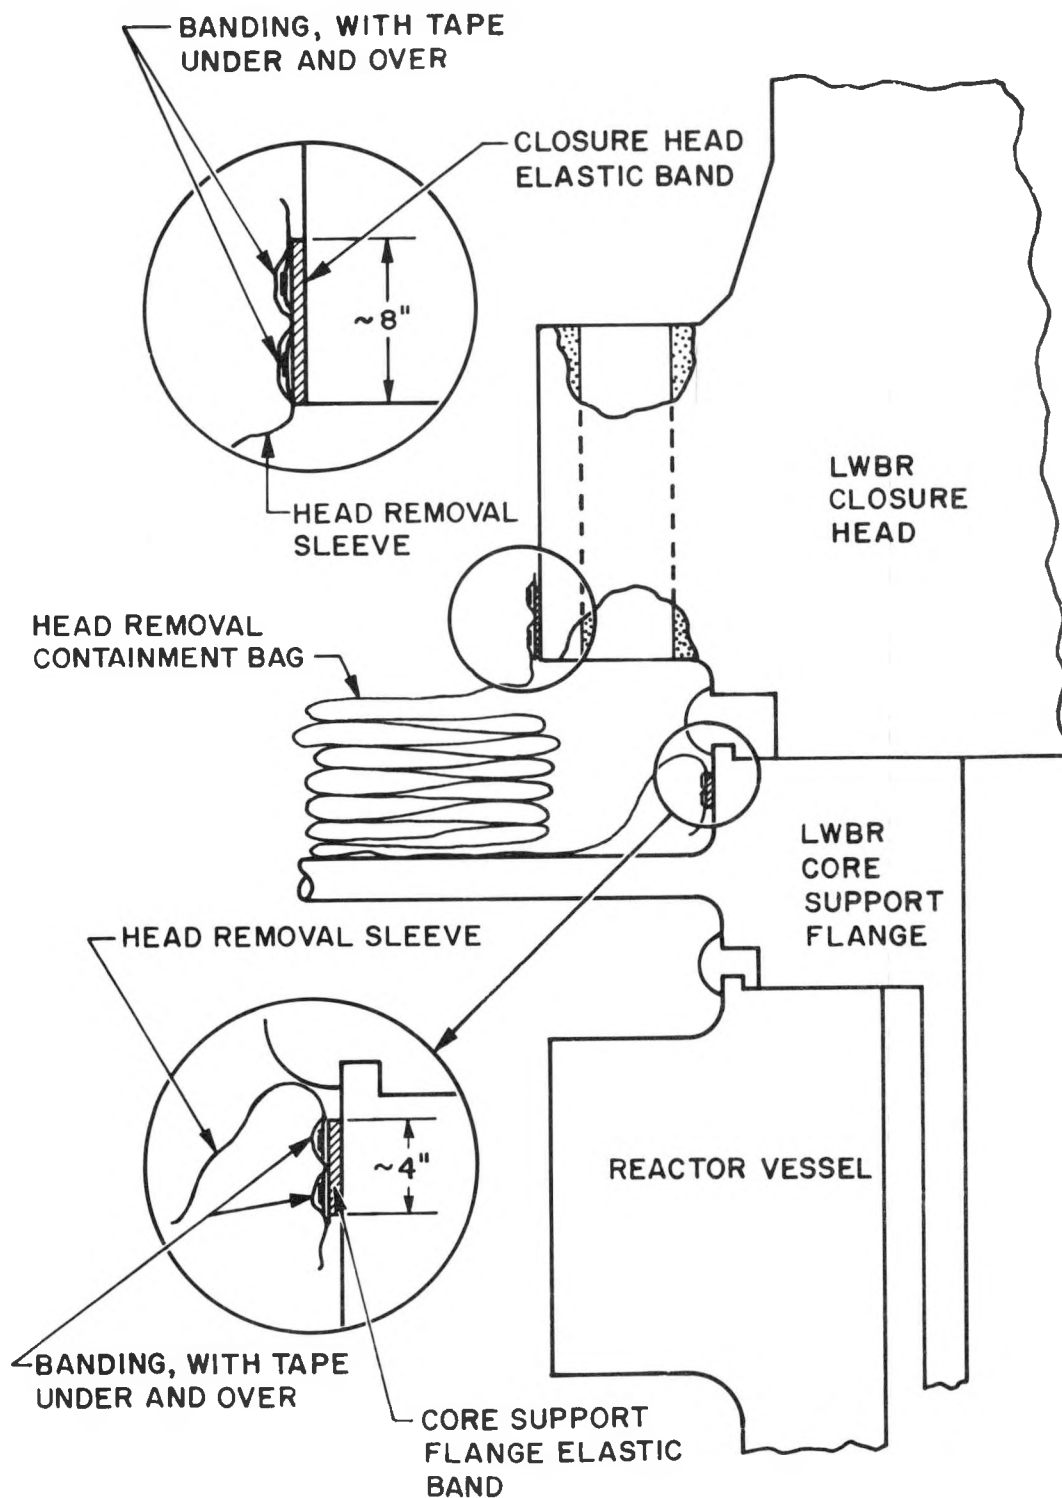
Attachment of Containment Between Closure Head and Core Support Flange
